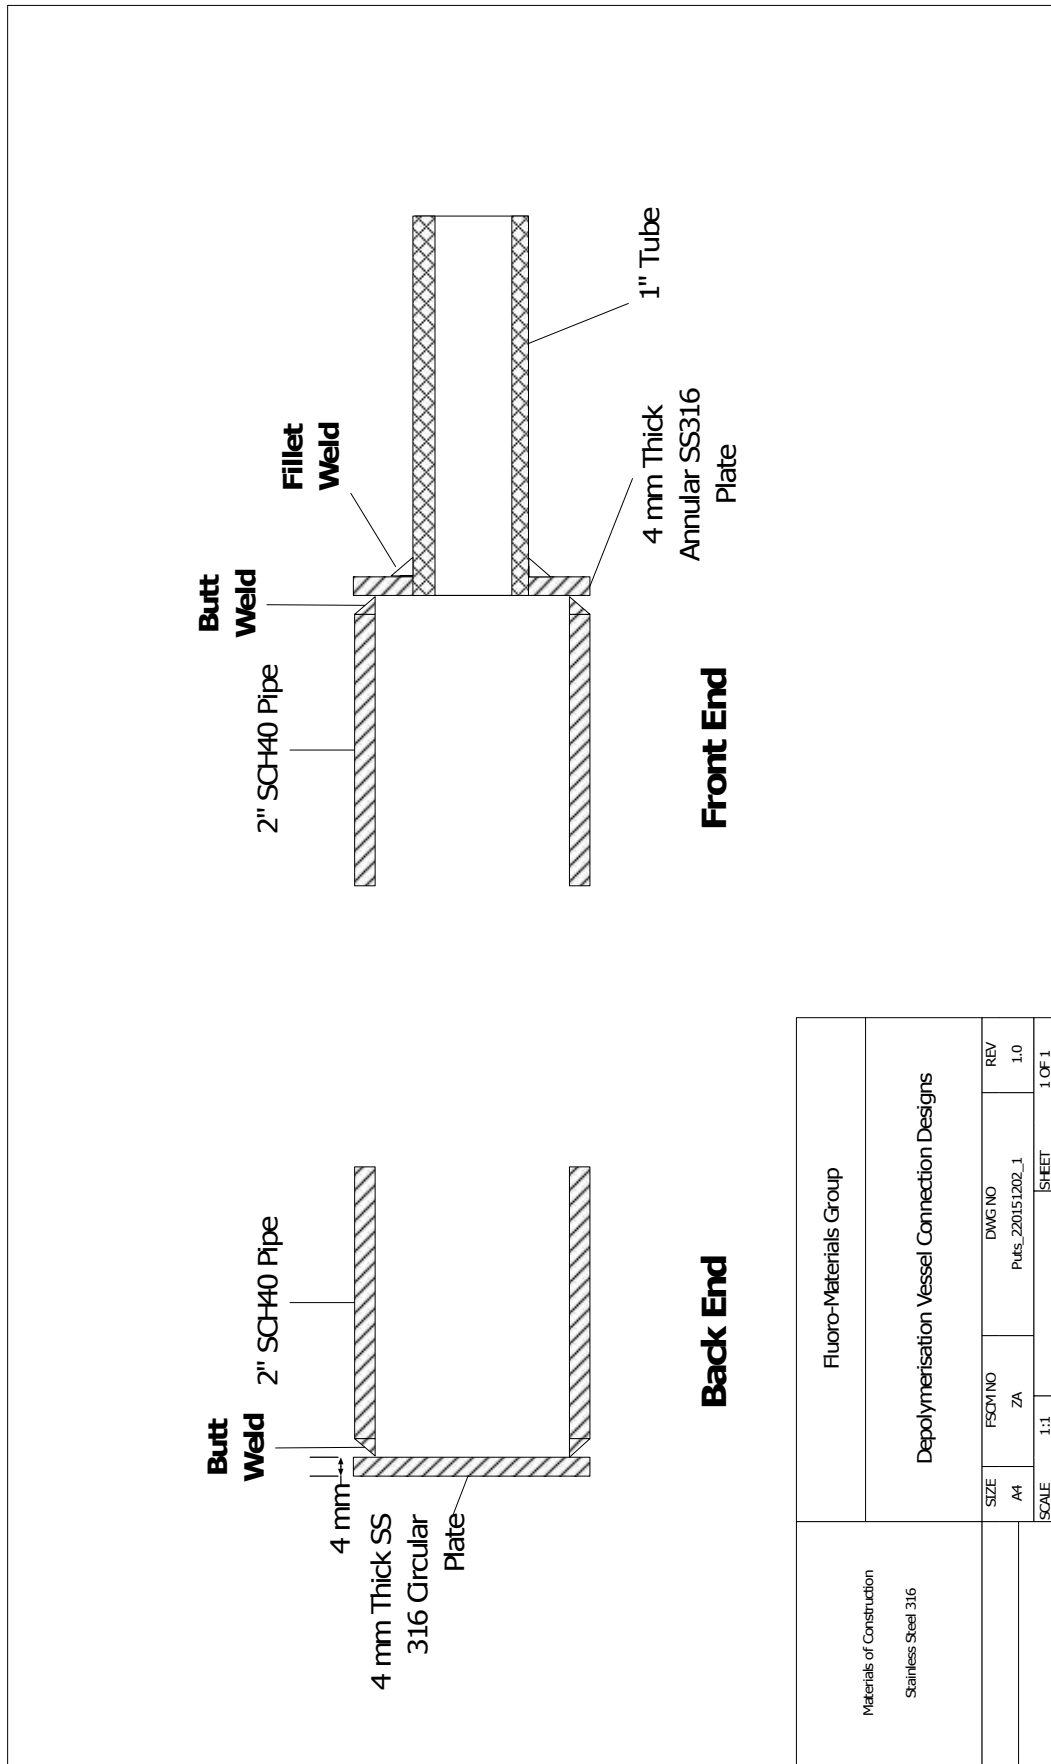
Detailed mechanical drawing of the depolymerisation vessel furnace insert.
